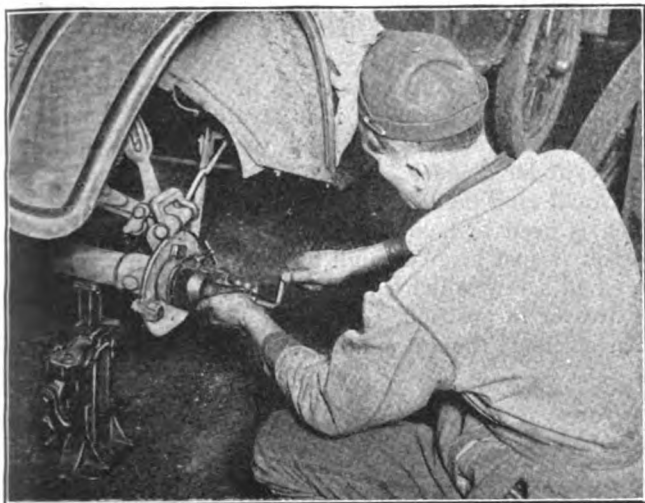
PULLING OFF A FORD AXLE HOUSING CAP.
